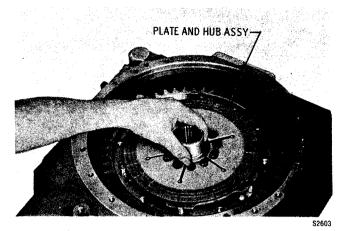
Installing high-range clutch plate and hub assembly (TT, TTB models with power takeoff)
